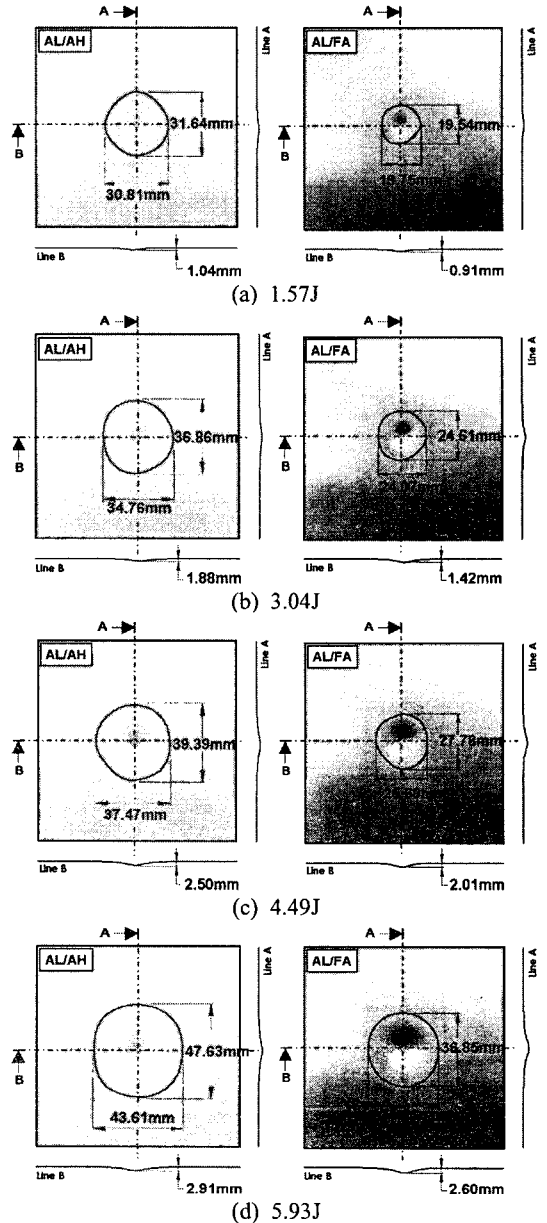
Impact damage areas for floor sandwich specimens after impact
